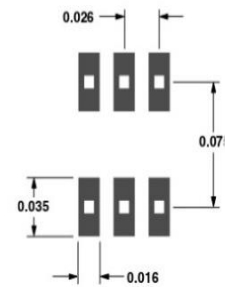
Recommended PCB Pad Layout for Avago's SC70 6L/SOT-363 Products.
